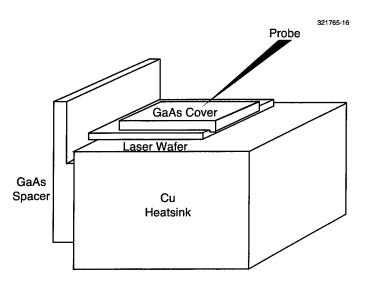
Perspective view of mounting scheme used to align and hold laser wafer during soldering to heatsink. Specifications: overhang, 2–7 μ m; yaw, <1 μ m; smile, <0.5 μ m.
